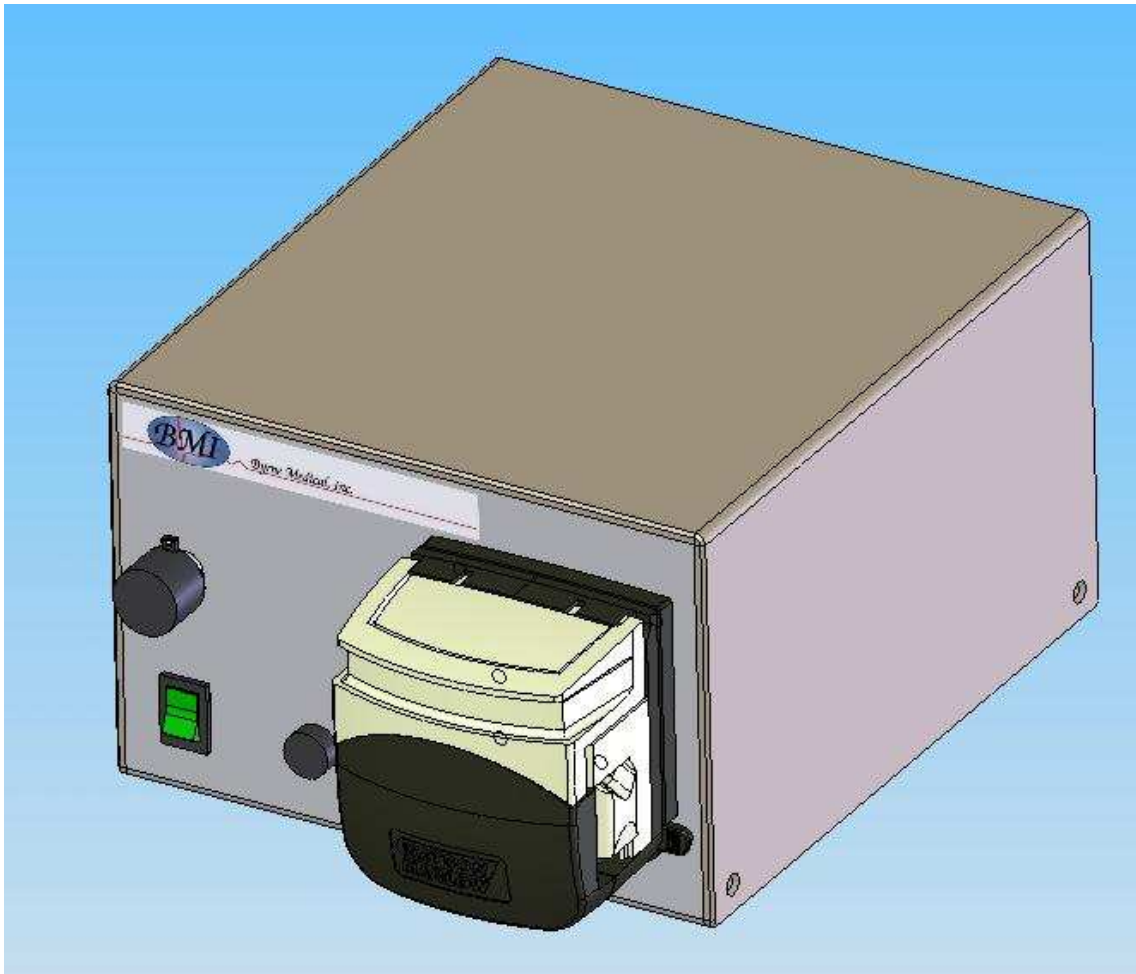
The Final Appearance of EGP-100 Irrigation Pump.
